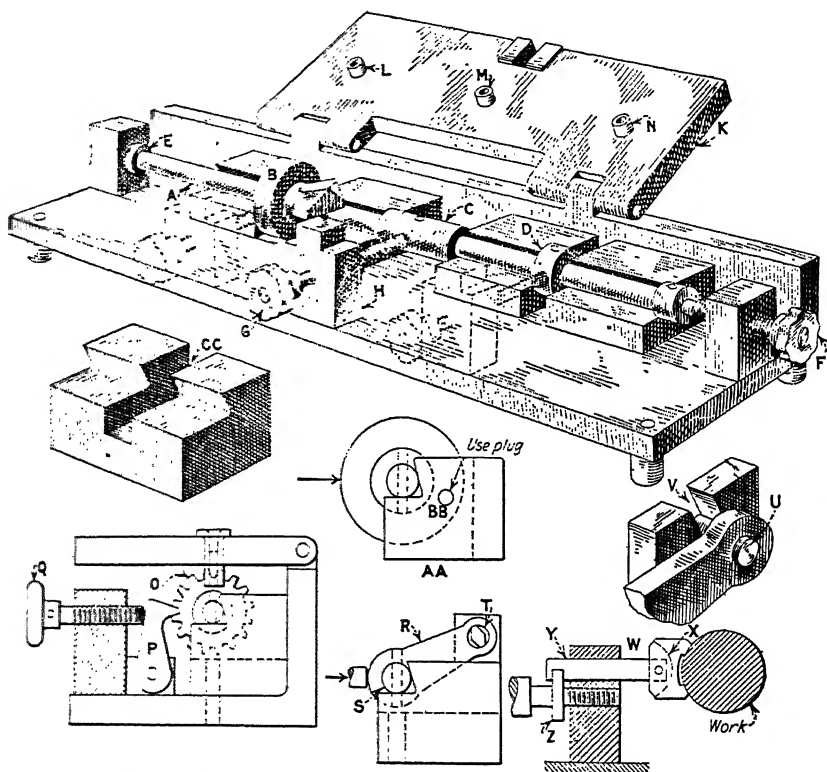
Locating and Assembling Jig for Shaft and Collars
